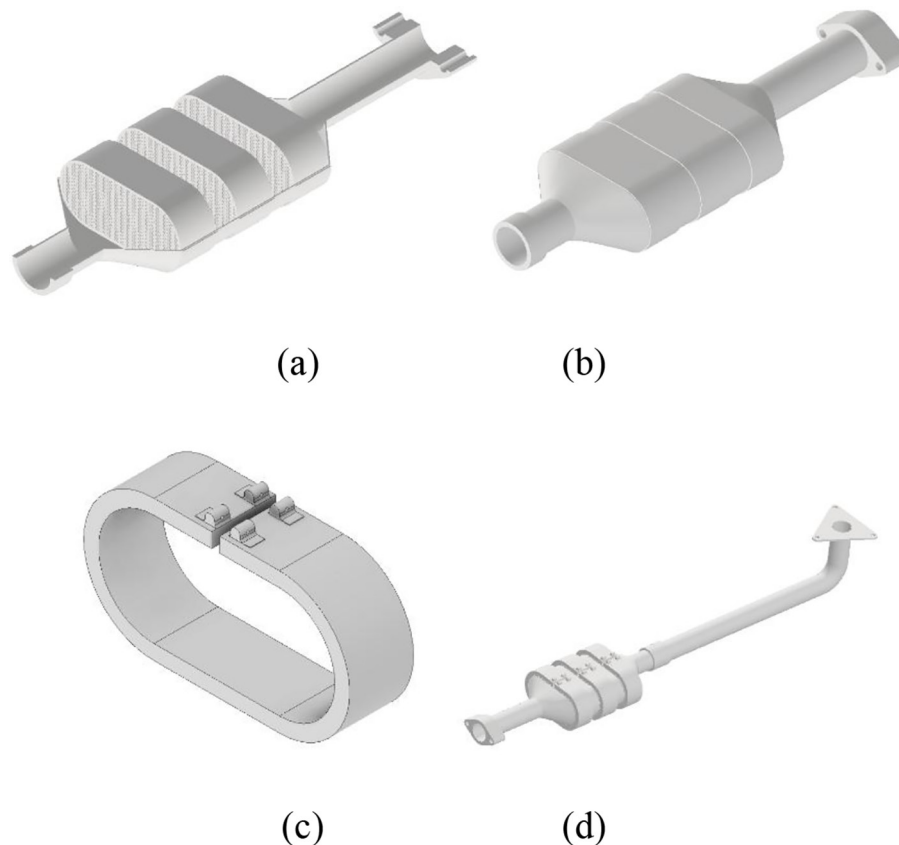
Designs and assemblies developed. Internal view (a), catalytic converter assembly (b), band-type heating resistor (c) and Complete system (d)
